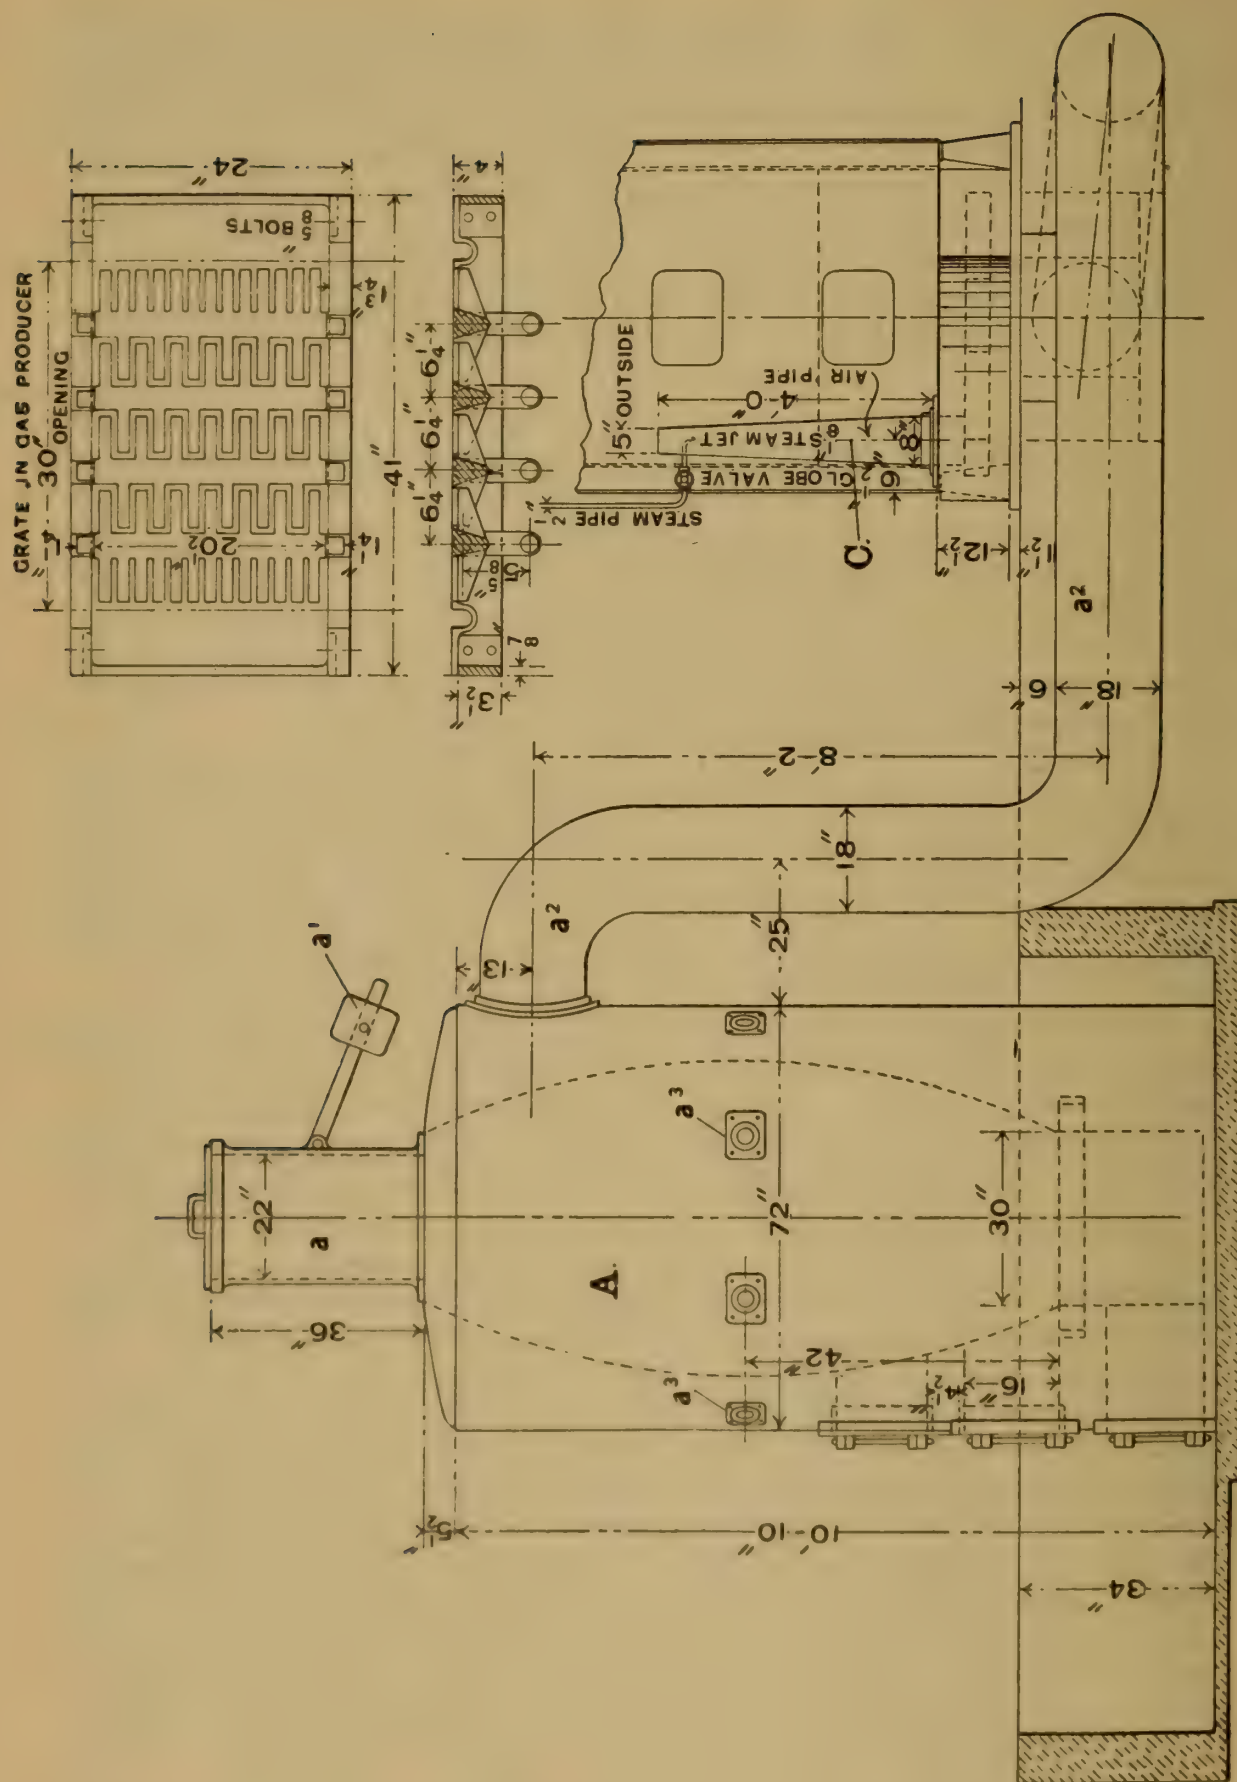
ELEVATION OF FUEL GAS PLANT.
